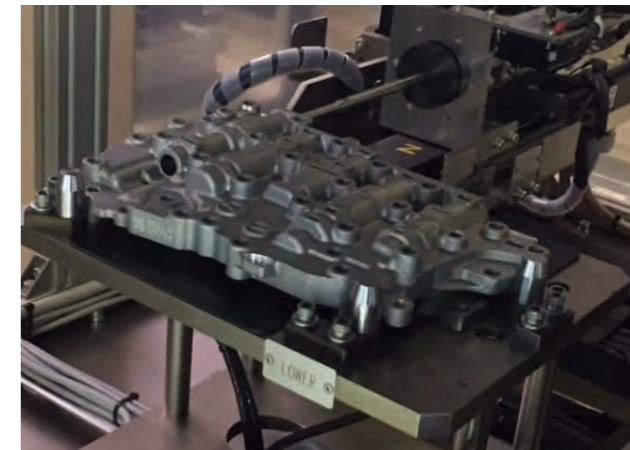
Automatic measurement equipment for inspecting inner surface of spool holes
